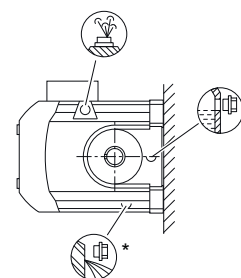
Mounting positions for helical gearbox E, foot-mounted design, sizes 39 - 149
